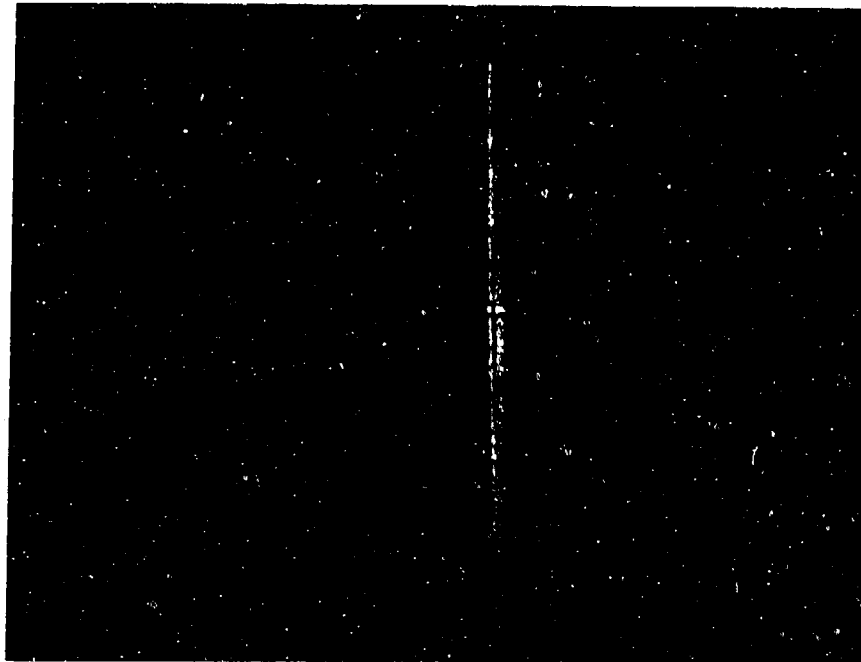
Corner weldment of 2219-T851 impacted at the critical cracking velocity.
